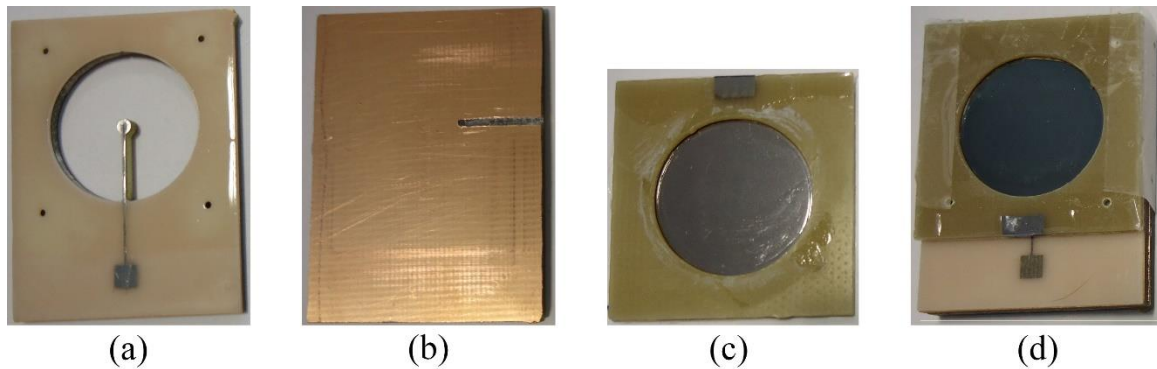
Components of an acoustic transducer developed using mechanical micromachining tool (a) bottom structure with printed electrode, (b) parts with the venting channel (c) printed conductive layer on thin film and glued on frame to fabricate membrane, and (d) assembled device.
